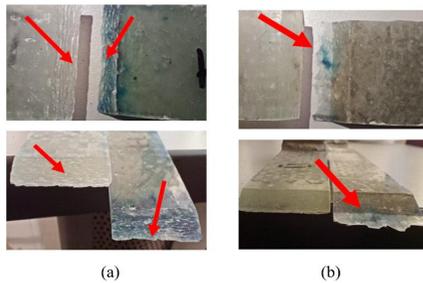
Specimen Failure Mode (a) Hand Lay-Up and (b) Vacuum Bagging
